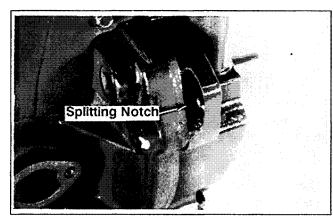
Splitting Notch of Closure Plate/ Crankcase.
